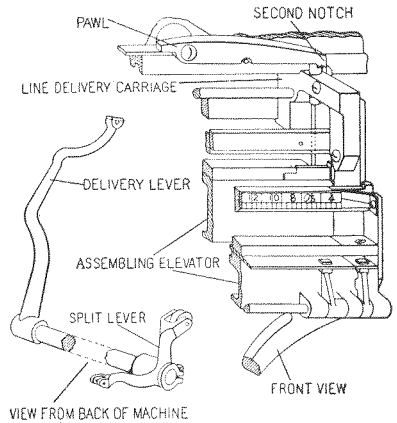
Diagram showing the parts of the transfer carriage, starting pin, assembling elevator and delivery lever in a separate view, showing how the line is carried over by said lever into the first-elevator jaw.
